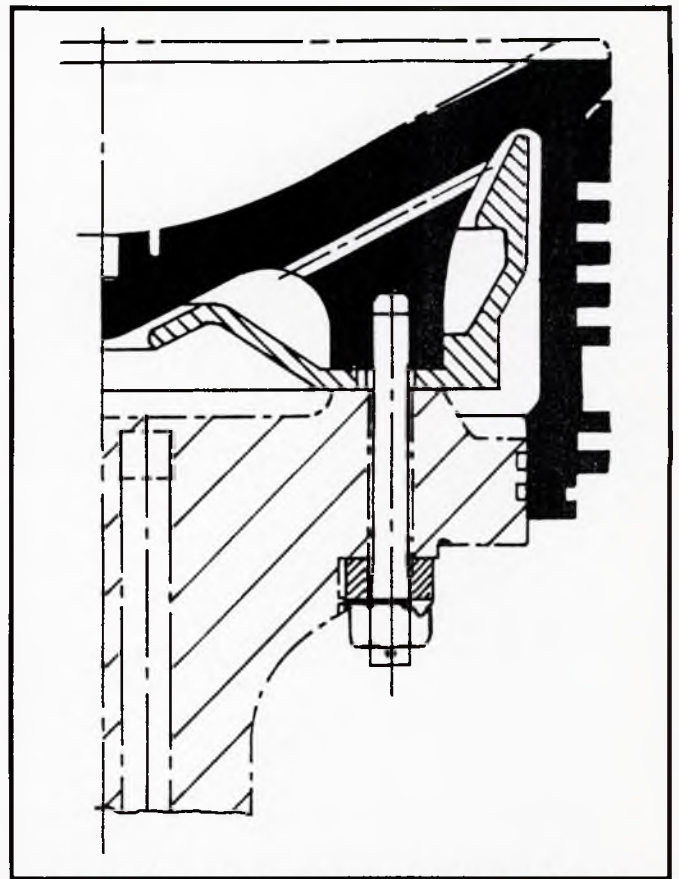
Piston design; pulse turbocharged J-engine upgrading package; $s/d = 0.118$
